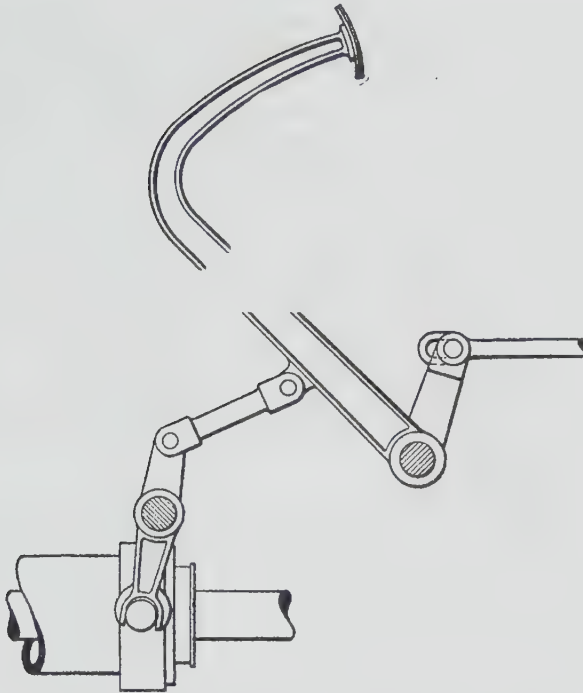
SINGLE PEDAL CONTROL, TOGGLE TYPE.
